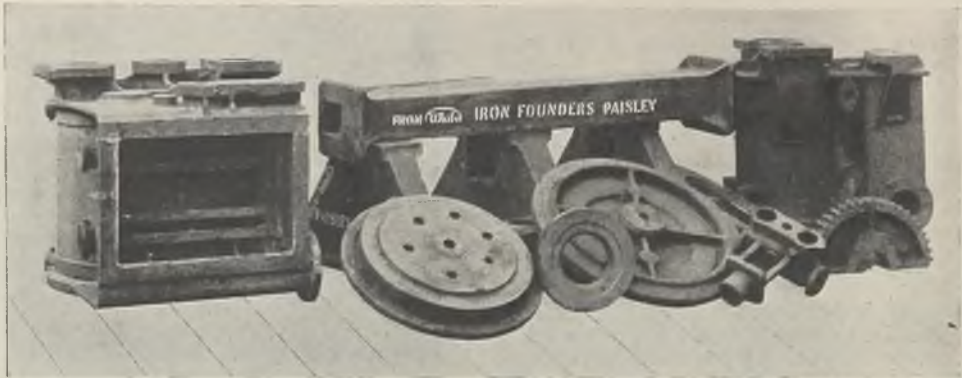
GROUP OF MAIN ENGINE CASTINGS, INCLUDING CYLINDERS (MEDIUM AND LOW PRESSURE), SOLEPLATES, COLUMNS, PISTONS AND CYLINDER COVERS.
